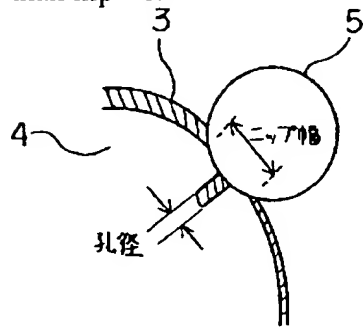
The U-U cross section in drawing 7 (two-step hole type).
